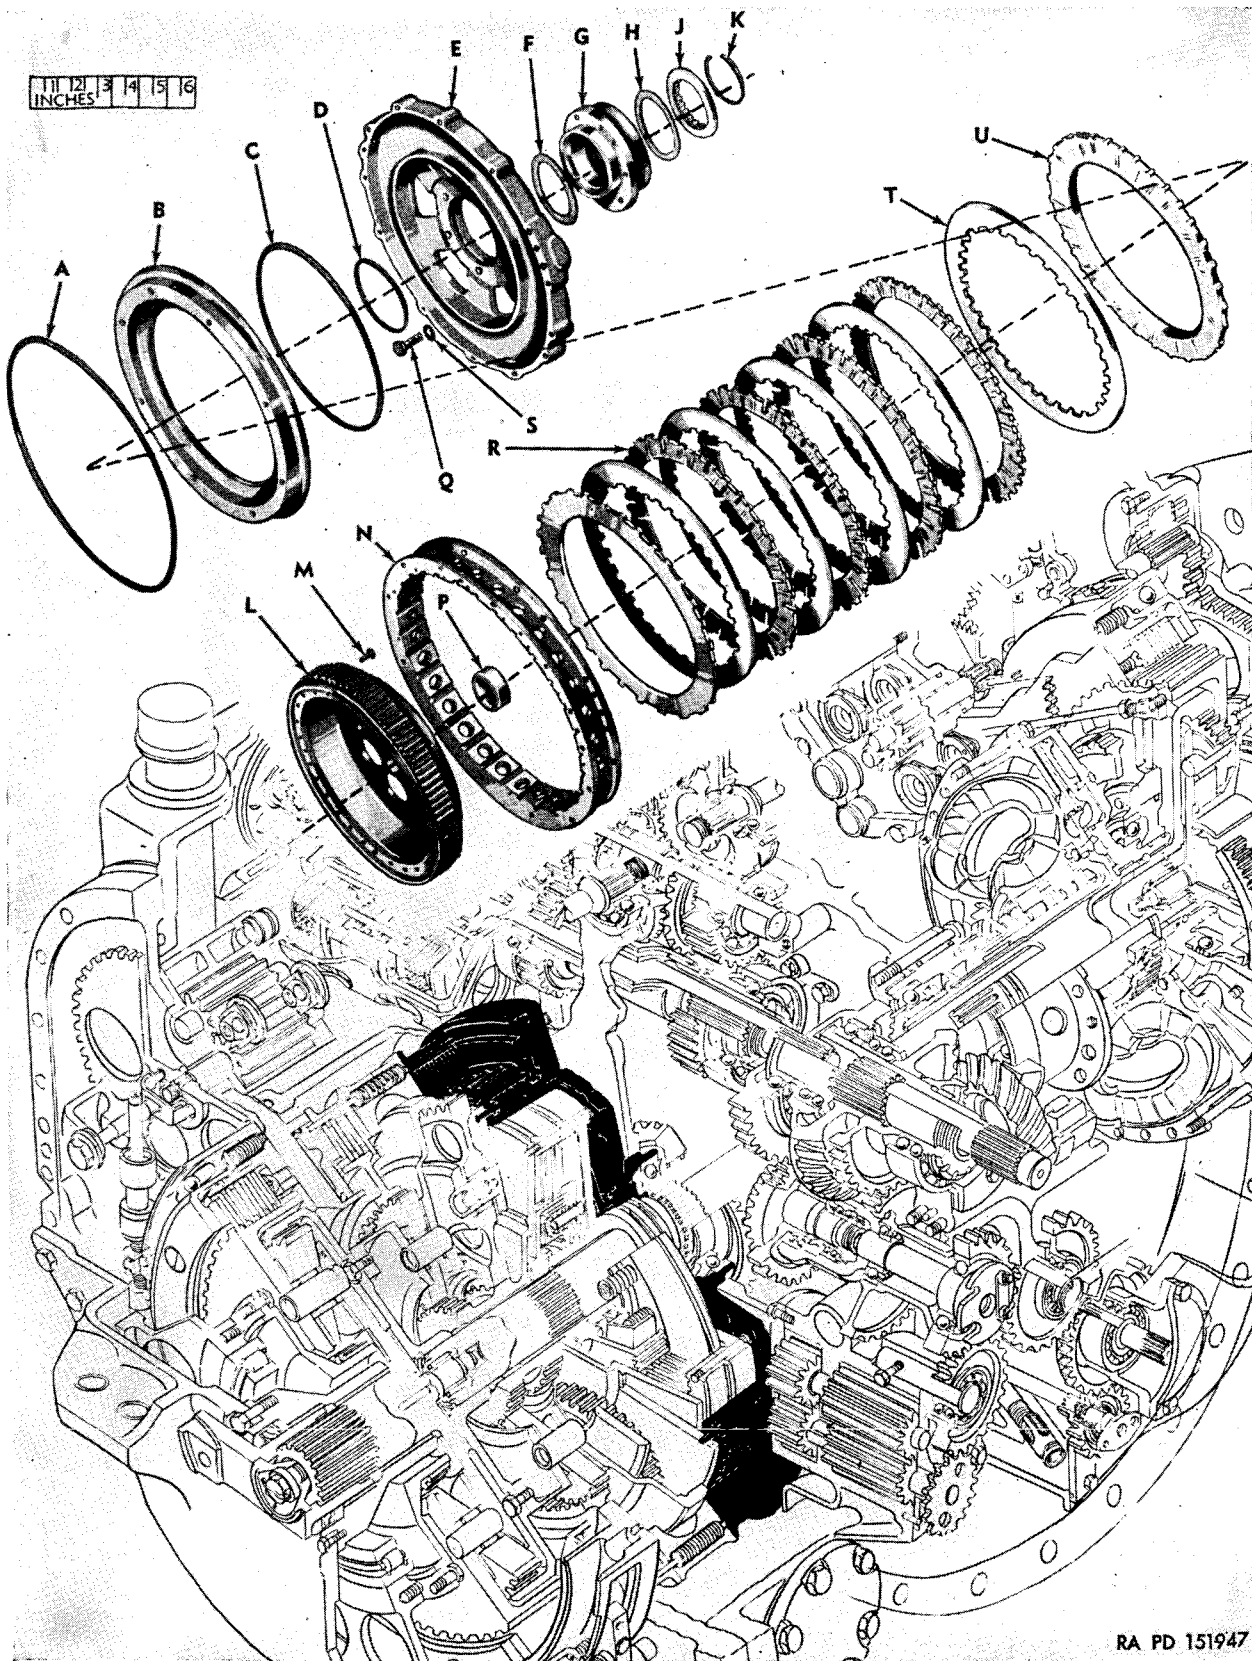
Right end plate, brake anchor, and brake disk assemblies—exploded view.
